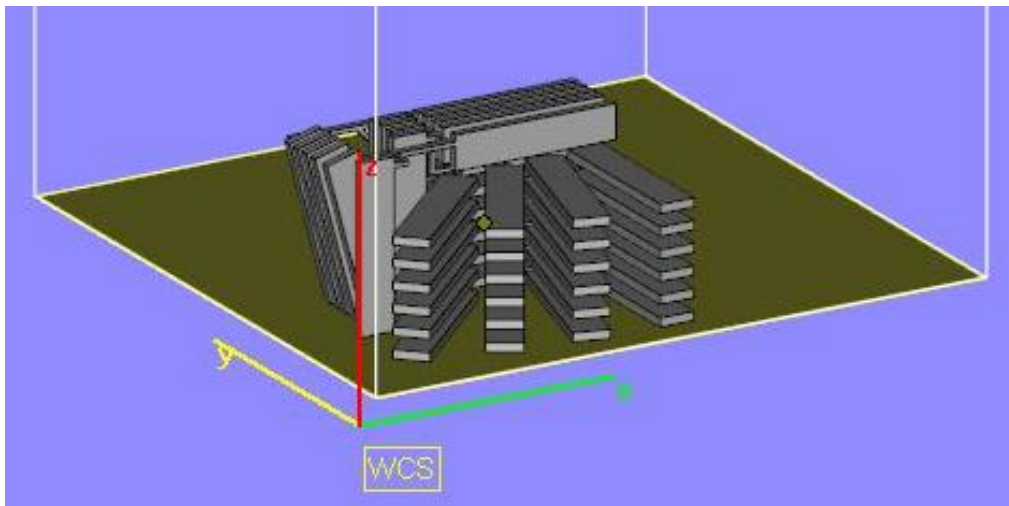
Three Dimensional Three Point Bend Test Specimen in the Printer Bath where Z is the direction in which the piston holding the part is moving.
